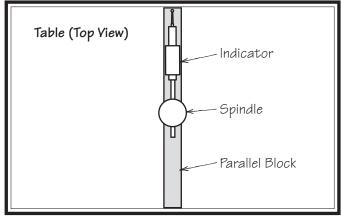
Parallel block and indicator positioned for the Y-axis measurement (top view).
